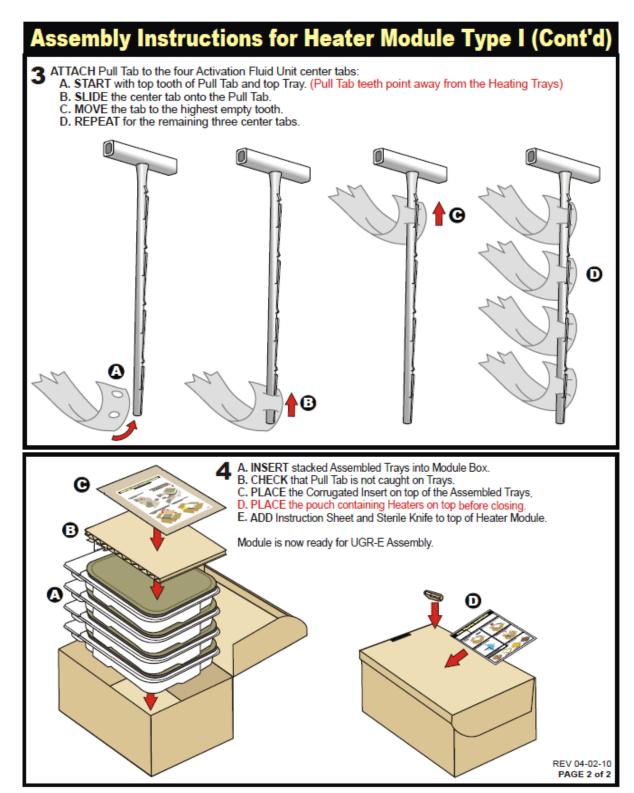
Assembly Instructions for Type I Heater Module – Continued
